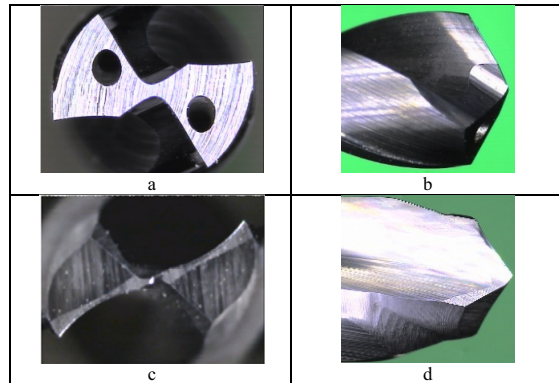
(a) Traditional tool front view; (b) Traditional tool side view; (c) Innovative tool front view; (d) Innovative tool side view.
